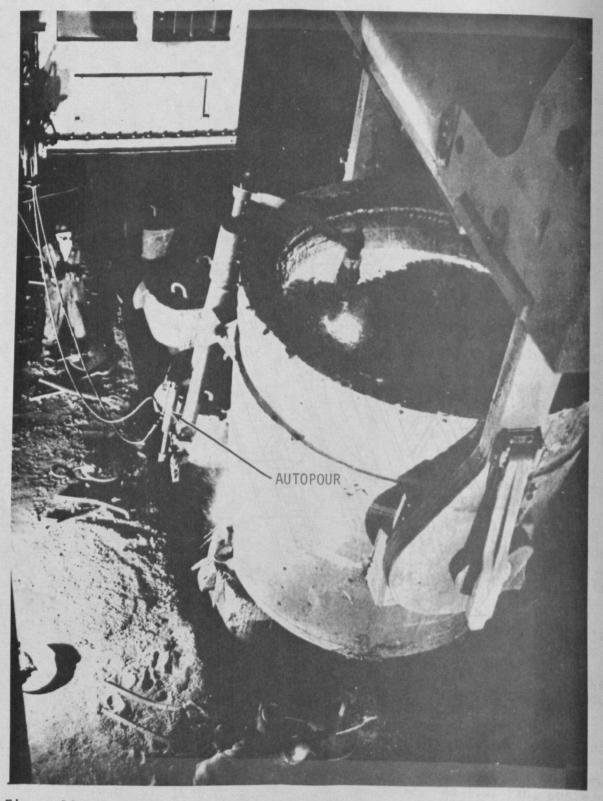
Hydraulic cylinder mounted on barrel of ladle rigging raises and lowers stopper rod to control flow of molten steel from ladle to ingot mold.
